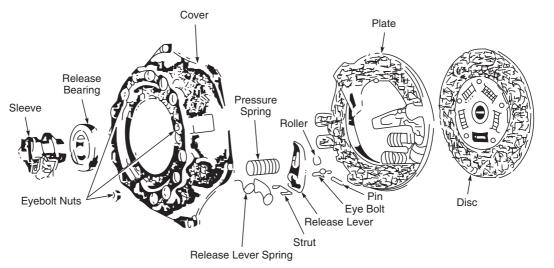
Clutch Assembly Showing Pressure Plate Dissembled
